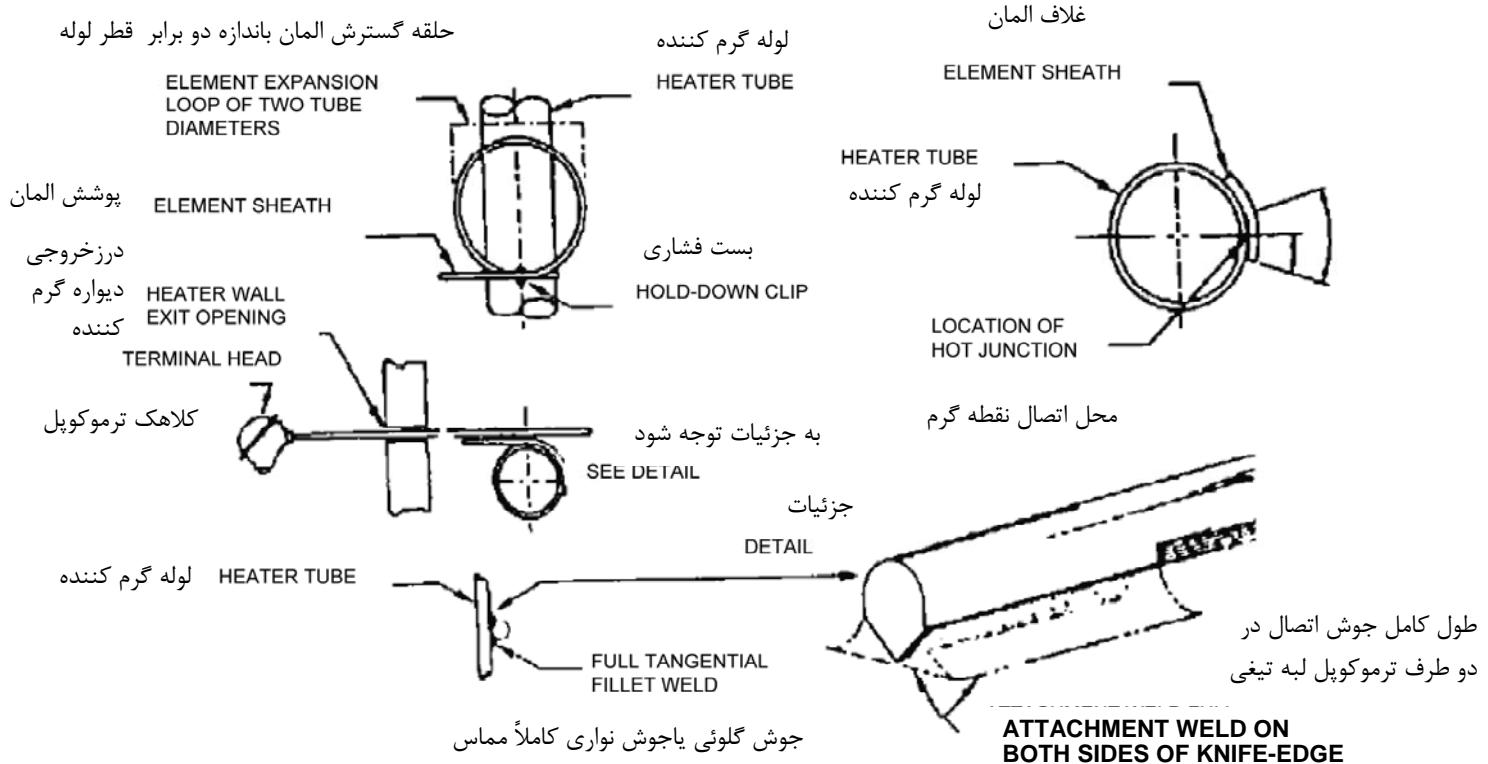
KNIFE EDGE TUBE SURFACE THERMOCOUPLE FOR HEATER TUBE
